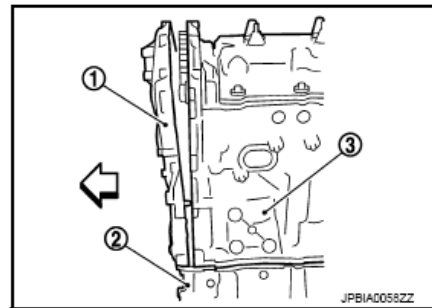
Identifying Front Timing Chain Case, Oil Pan (Upper) And Cylinder Block
